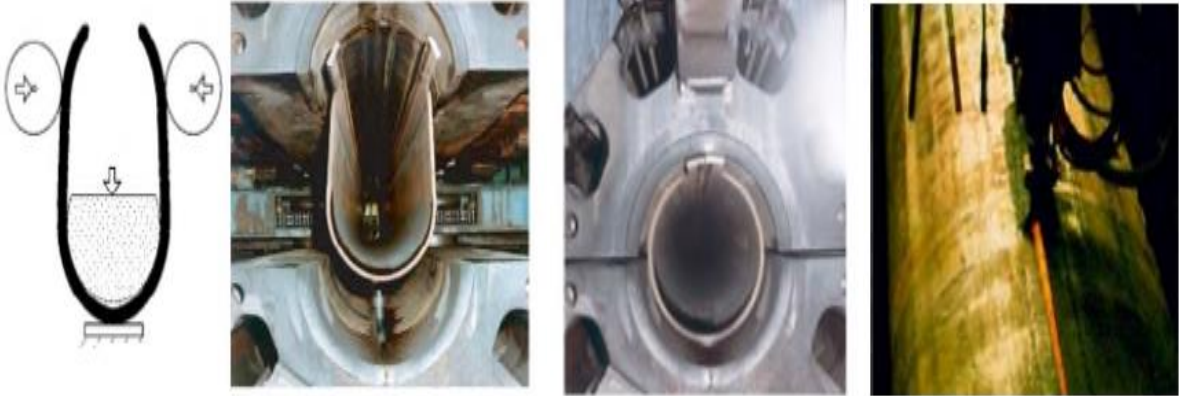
Process welded pipes in longitudinal form [4,5].
